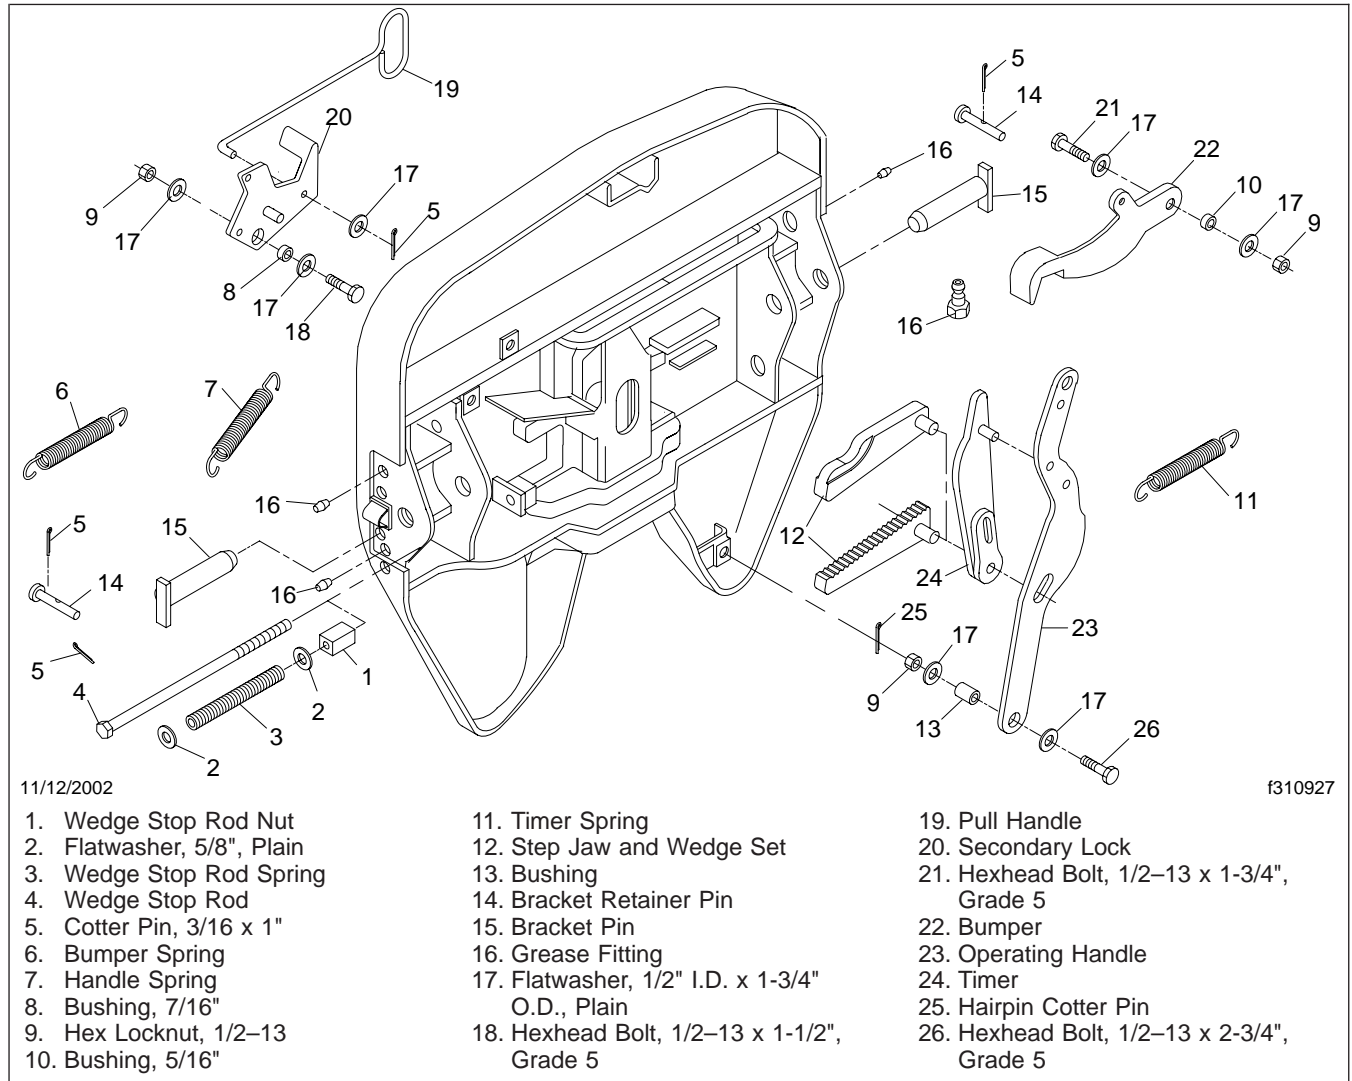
, Fontaine 6000 and 7000 No-slack II Series Fifth Wheel (left side release shown)
